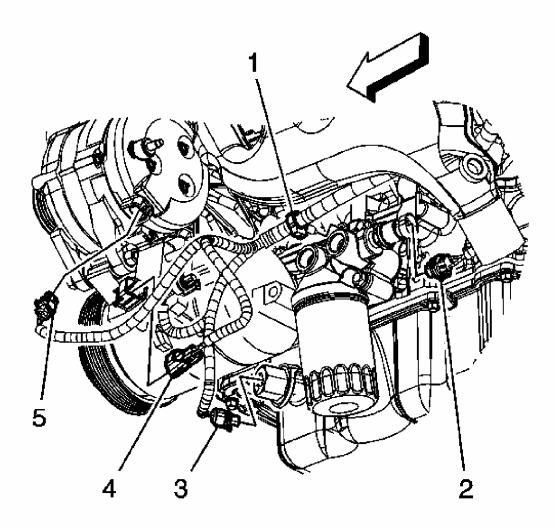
Engine Harness Electrical Connectors Courtesy of GENERAL MOTORS CORP.
